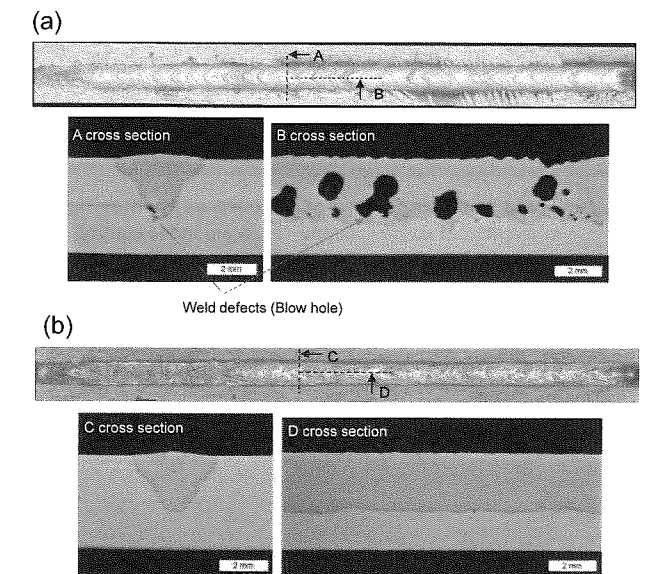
Results of overlap welding of 2 mm thickness 6000 type aluminum alloy. (a) condition of weld defects formation, (b) condition of suppressing weld defects.
